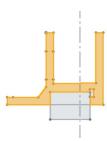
Upper half side view sketch of hub(highlighted). Gray parts are the bearing and groove ring(smaller rectangle on right side) location
